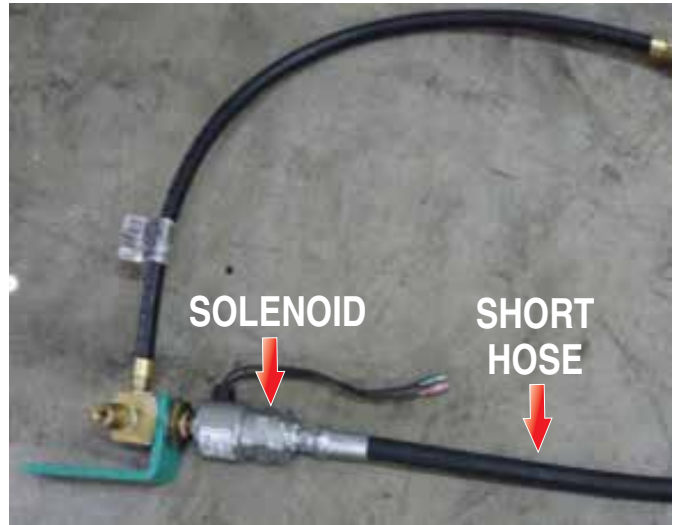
Connecting Hose to Safety Lock-Off Valve Assembly (Solenoid)
